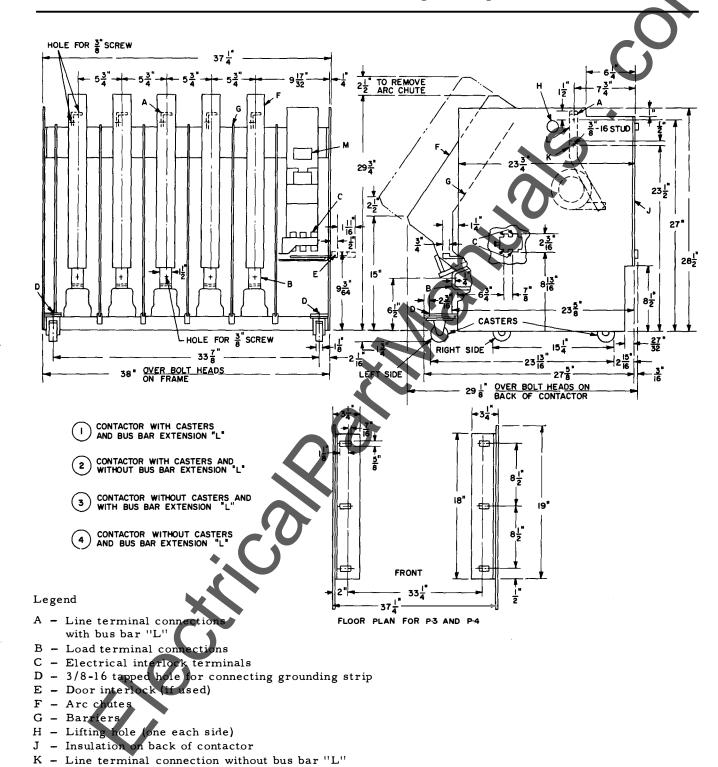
Dimensions of IC2814-F151 high-voltage contactor
